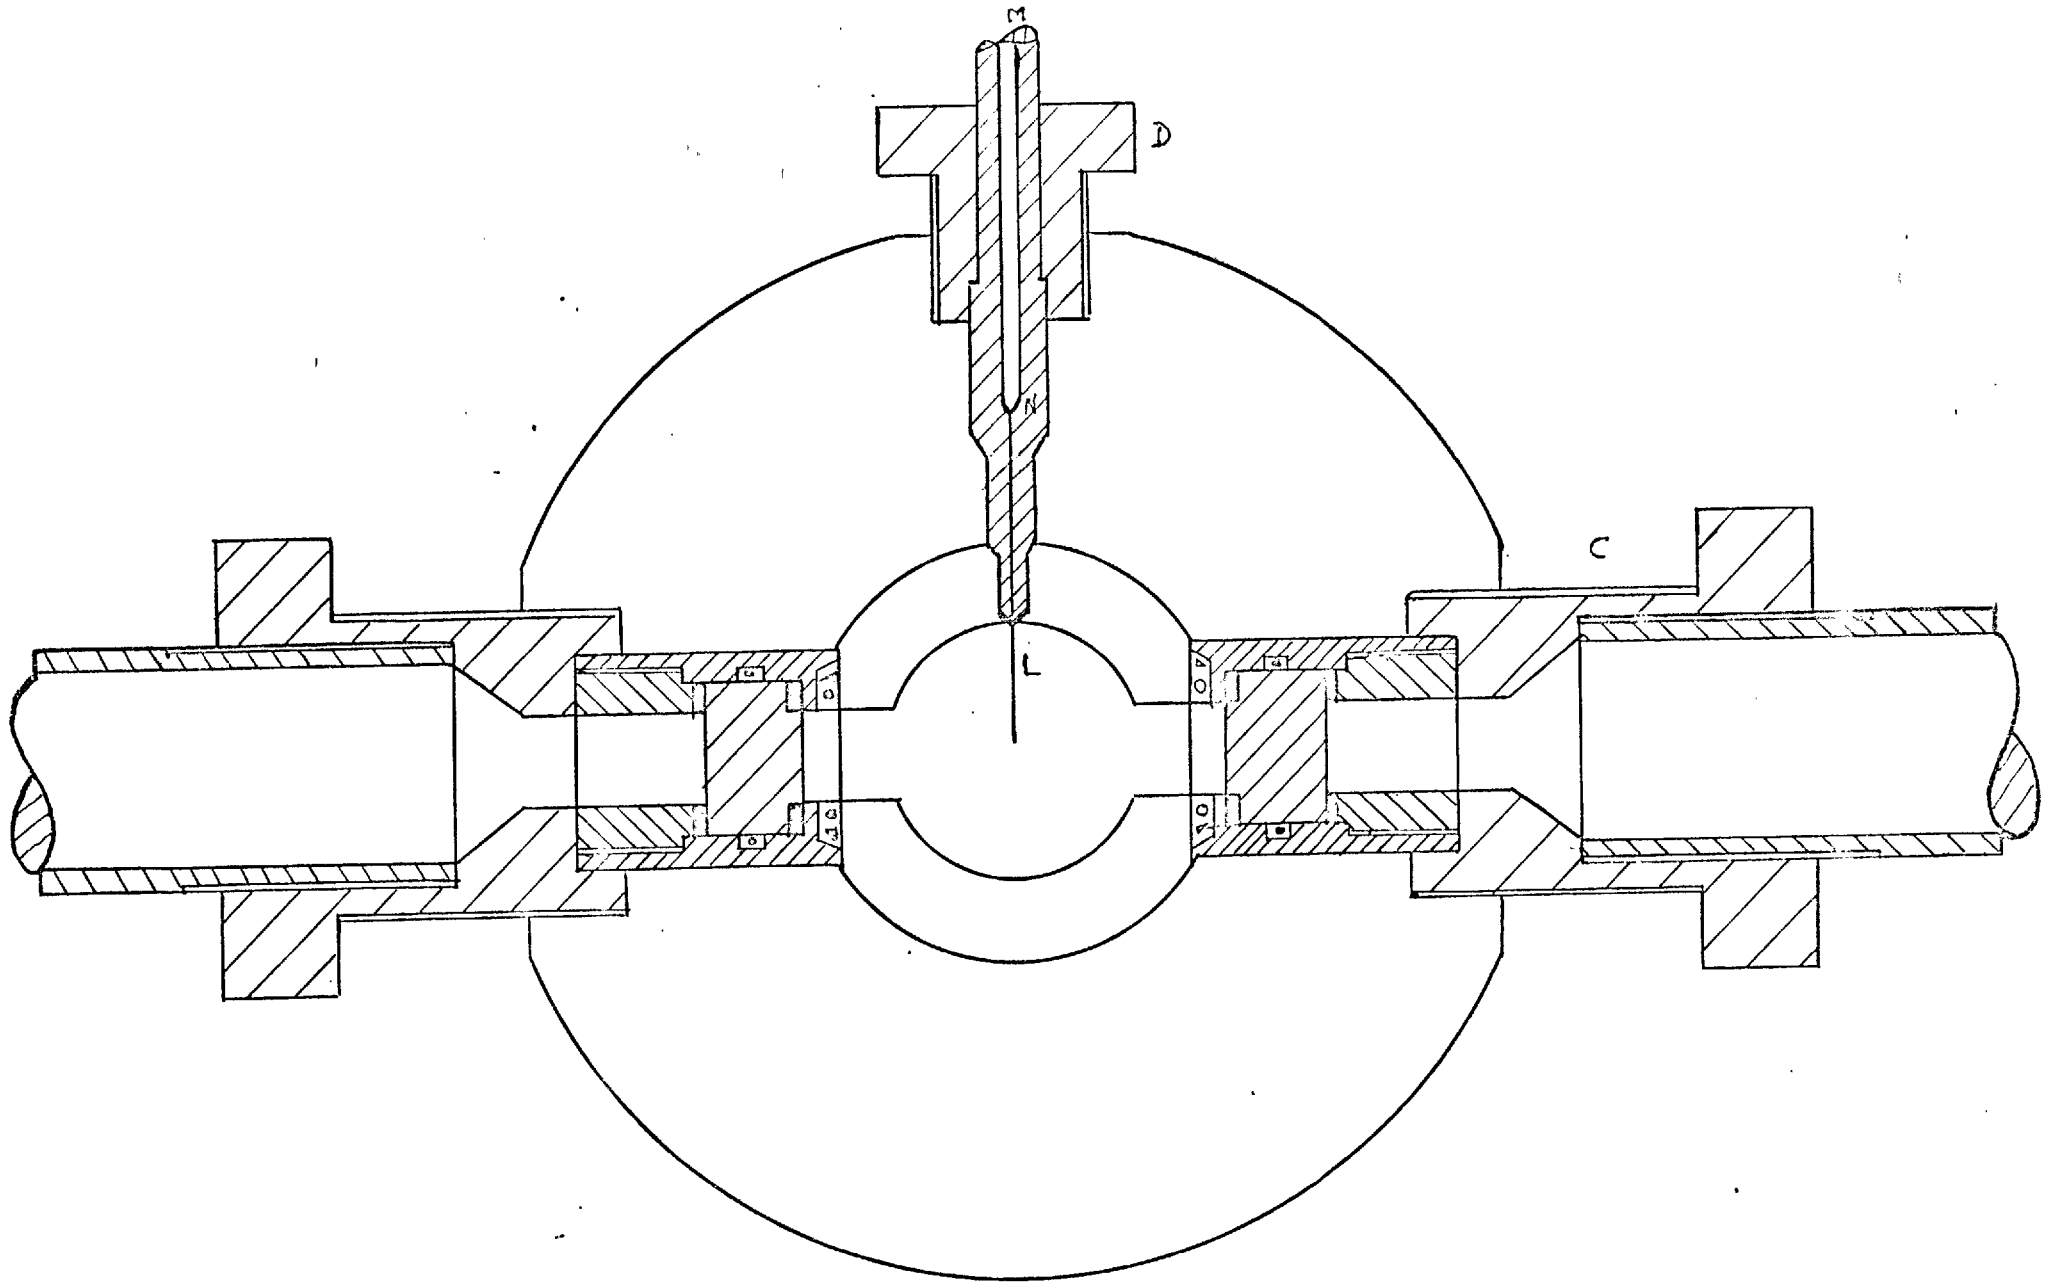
Sectional Top view of the pressure vessel assembly
